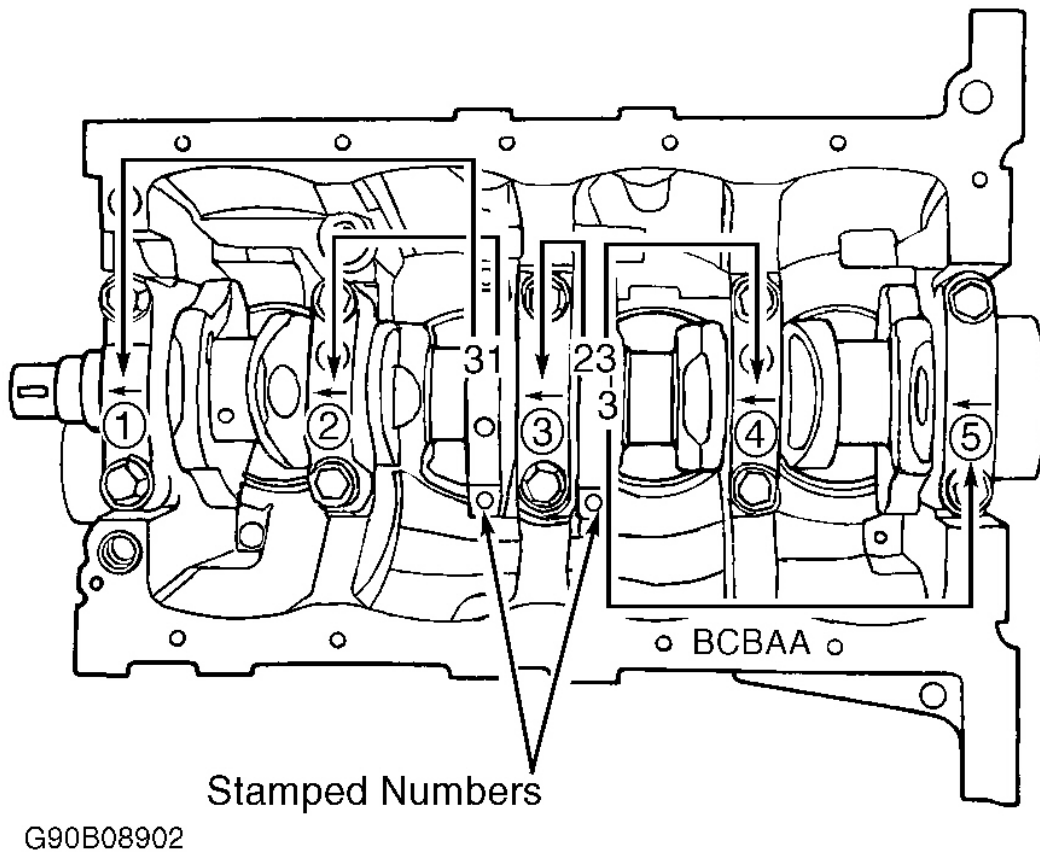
Locating Numerical Marks On Crankshaft Webs (SOHC)
